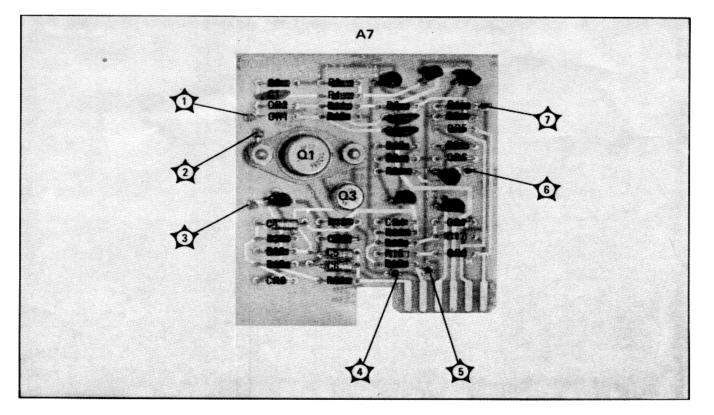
Signal Identifier and Attenuator Driver Assembly A7
